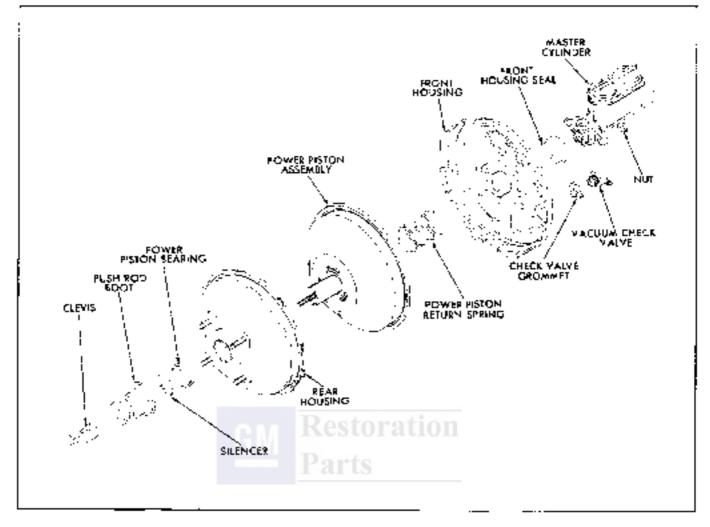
A-5 Exploded View of Ponting Power Brake Unit
